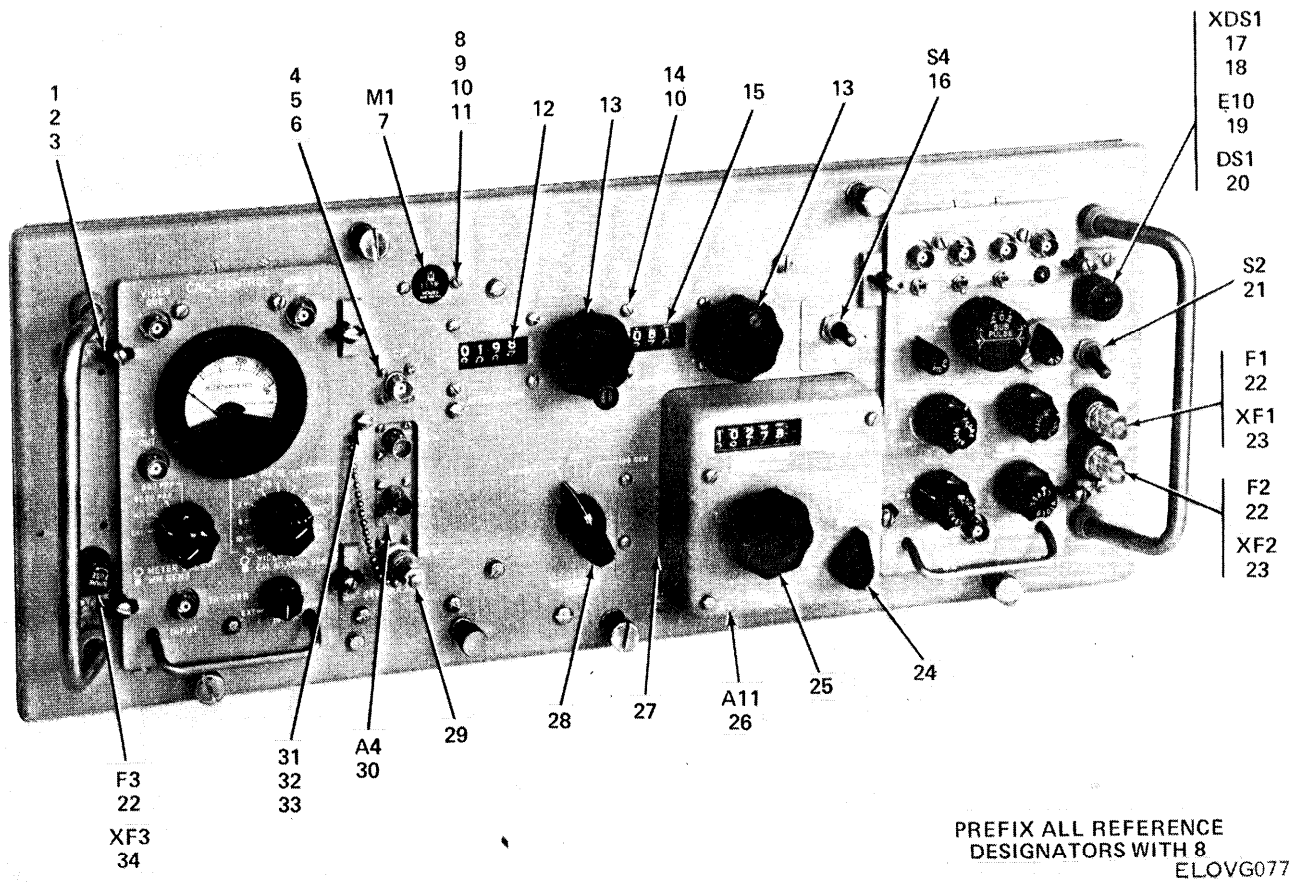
① chassis assembly, unit 8 (sheet 1 of 2).
